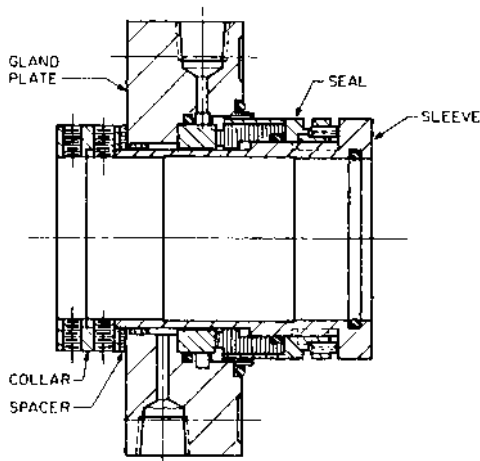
A single package (cartridge) seal assembly (John Crane Inc.)
